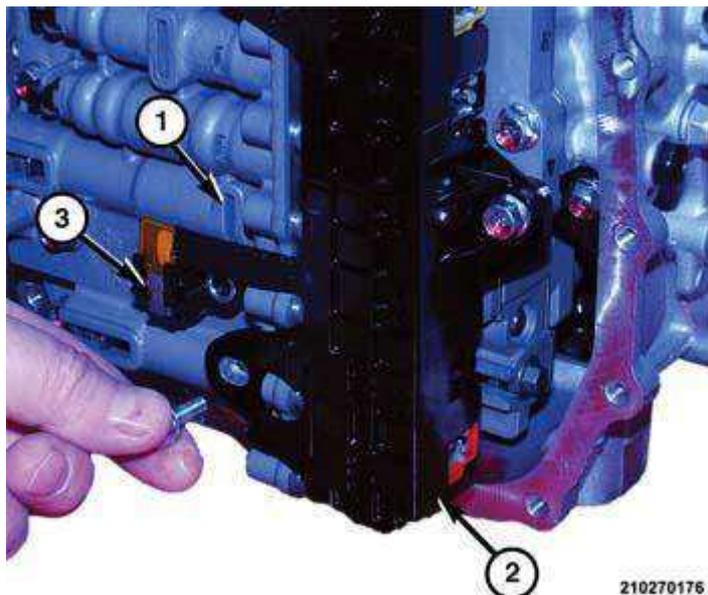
Solenoid Valve Connector, Valve Body & Bolts
